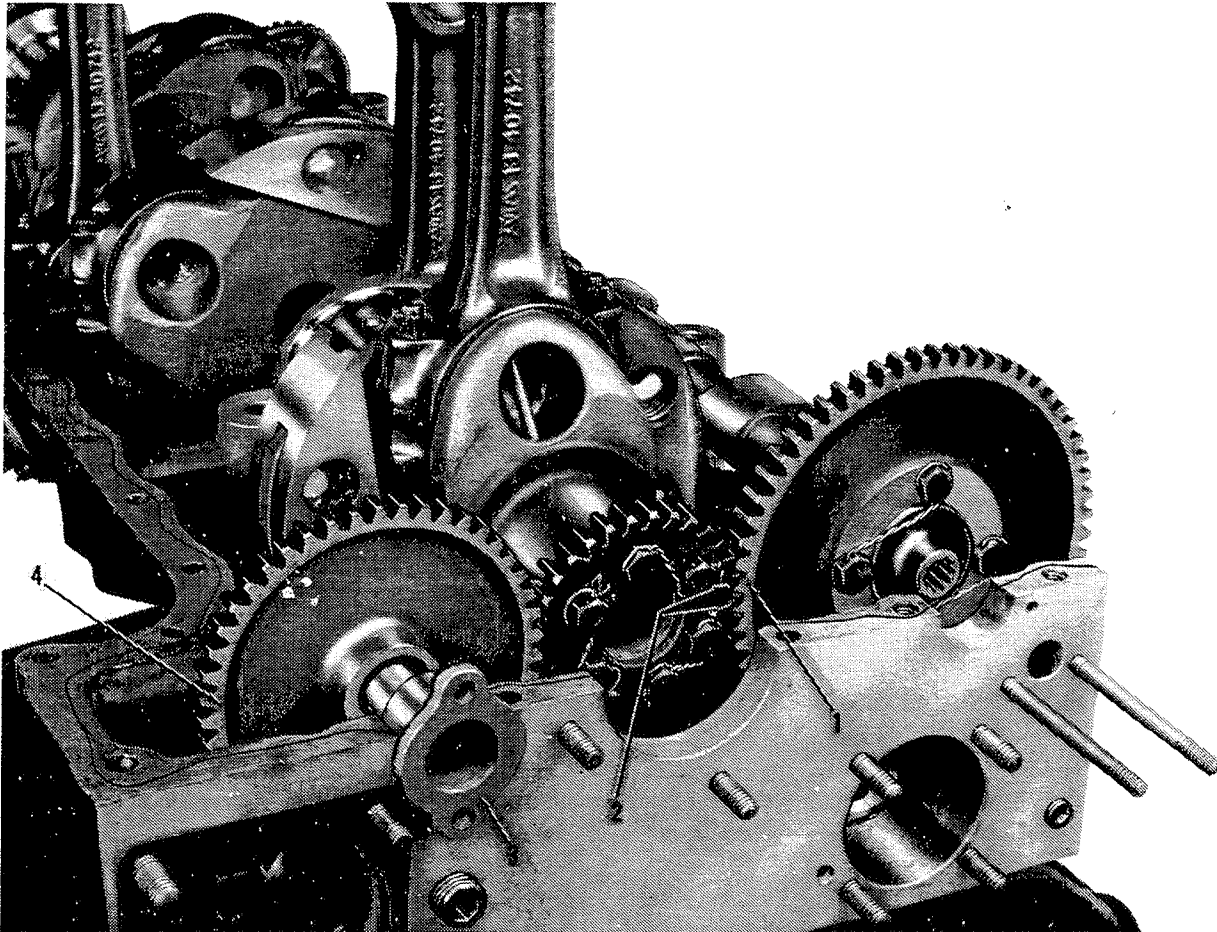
A. IDLER GEAR SUPPORT PIN AND TIMING MARKS.
